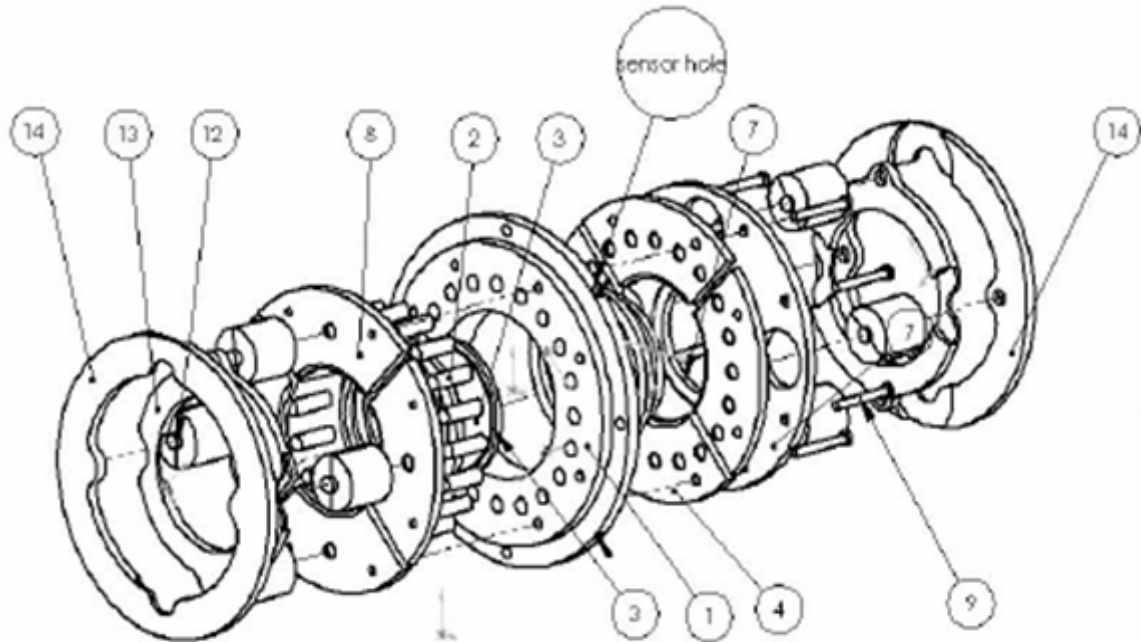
Disassembled design of the magnetic ring spinning machine
